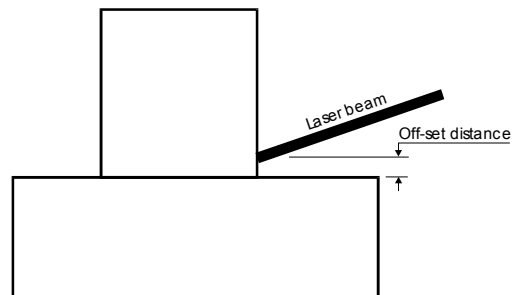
Off-set distance of laser beam relative to weld joint.
